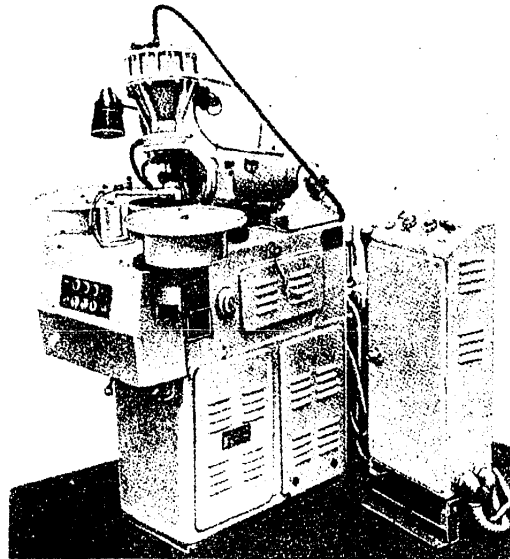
General view of a machine tool for machining aspherical surfaces with the application of a flat template.
